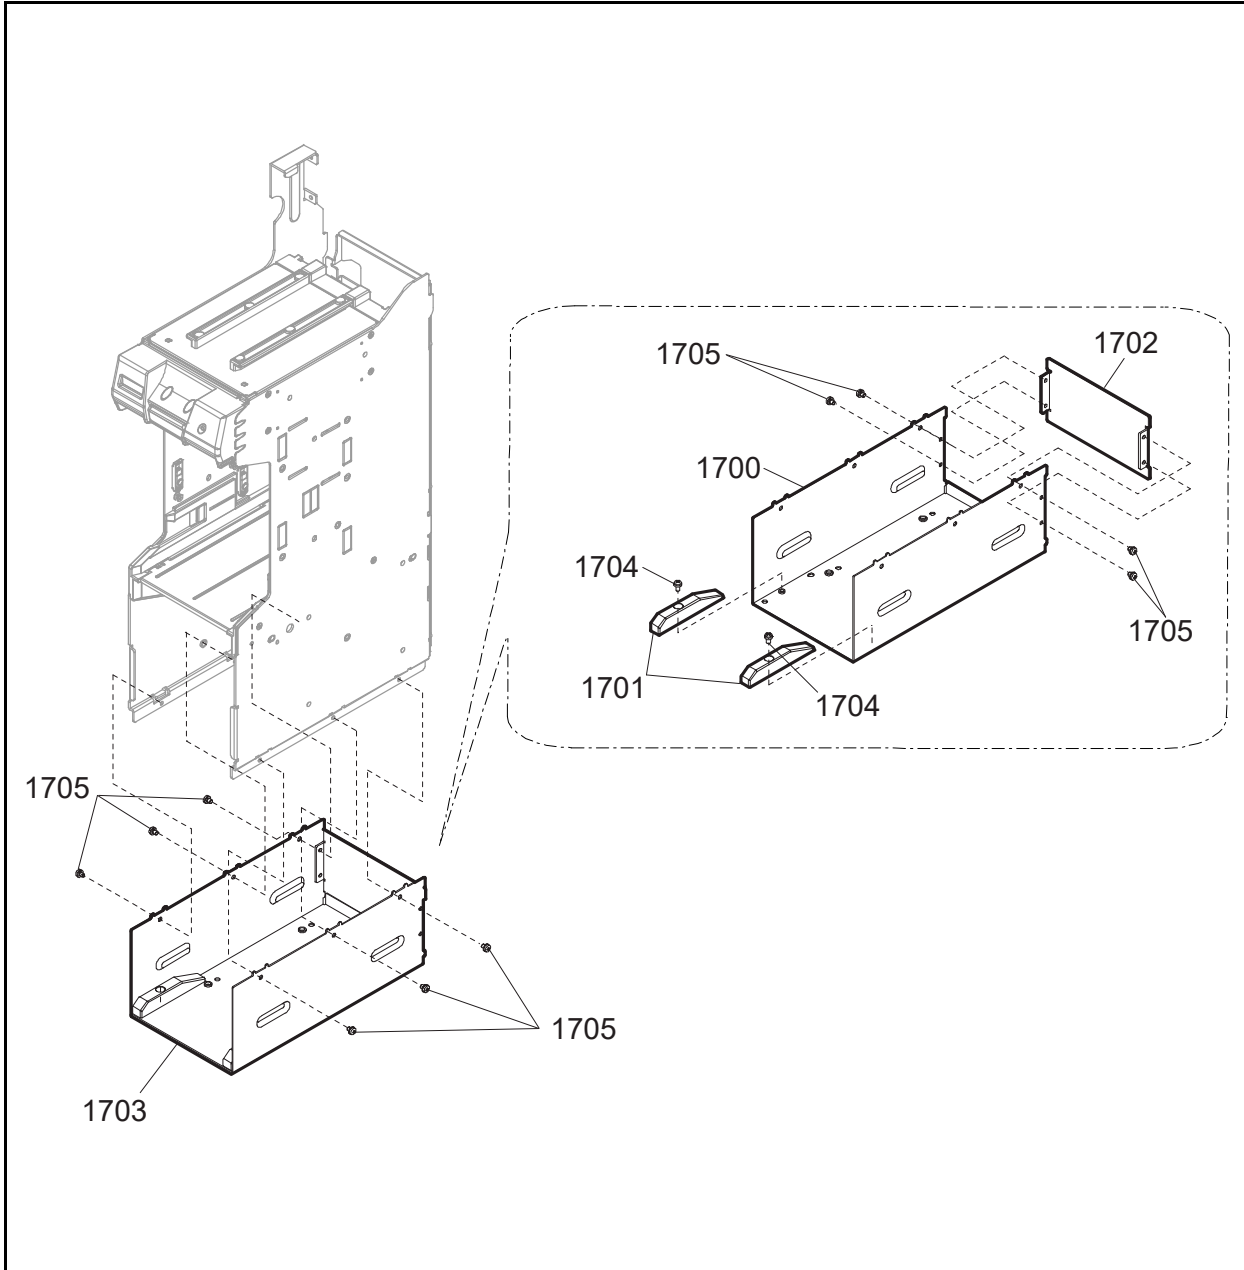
iPRO-RC Large Cash Box Frame Unit Exploded View
